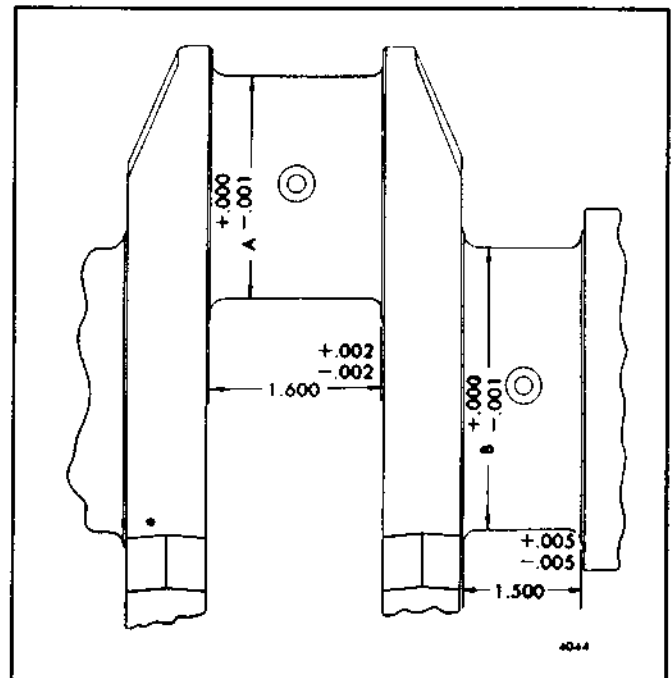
Dimensions of Crankshaft Journals - In-line Engine
